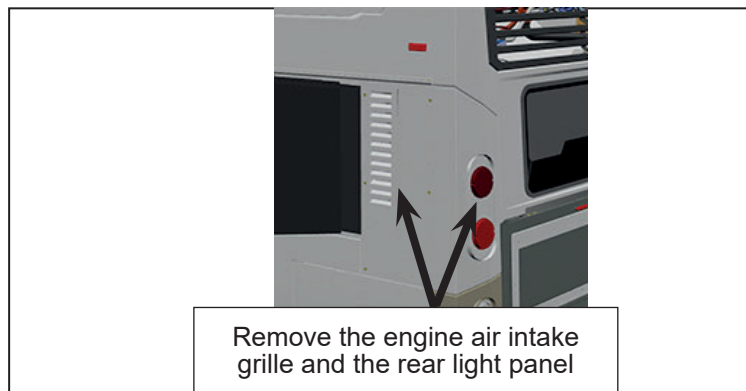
Engine Air Intake Panel and Rear Light Panel
